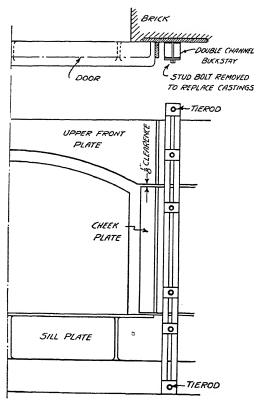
Construction of Door Frames—Note Protection by Brick.
